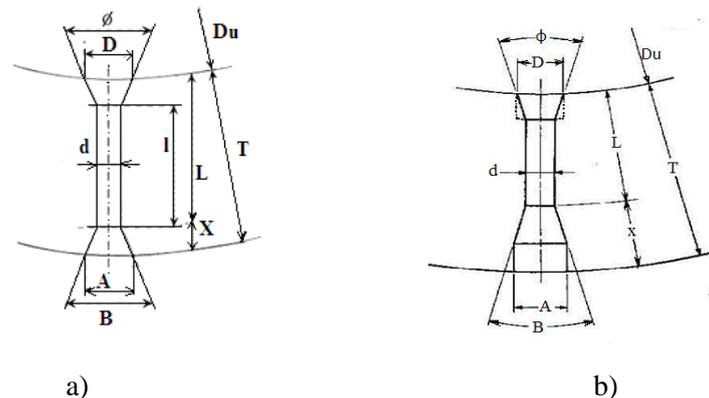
Construction parameters of die hole "Radviliskis machine factory"
